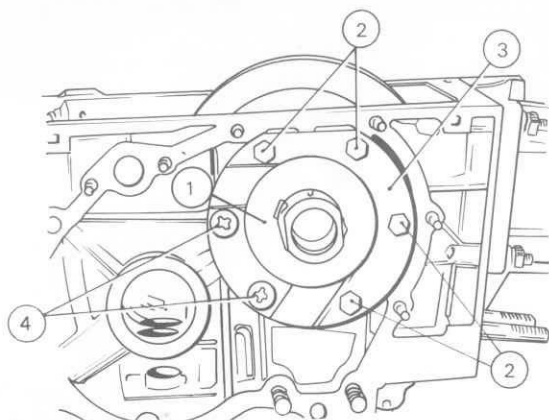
26 Crankshaft support at the timing gear end. 1 is a ring, 2 are the four bolts, 3 is the support and 4 are the two cross-head screws
